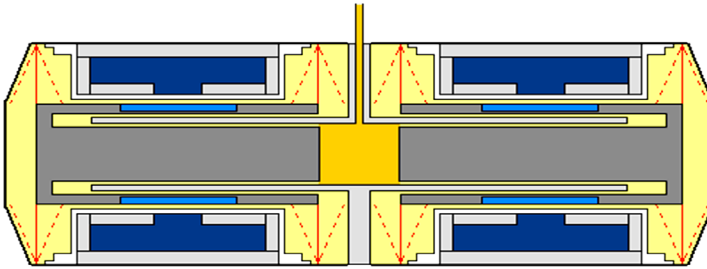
Principle design of AIM flexure bearing moving magnet compressor
